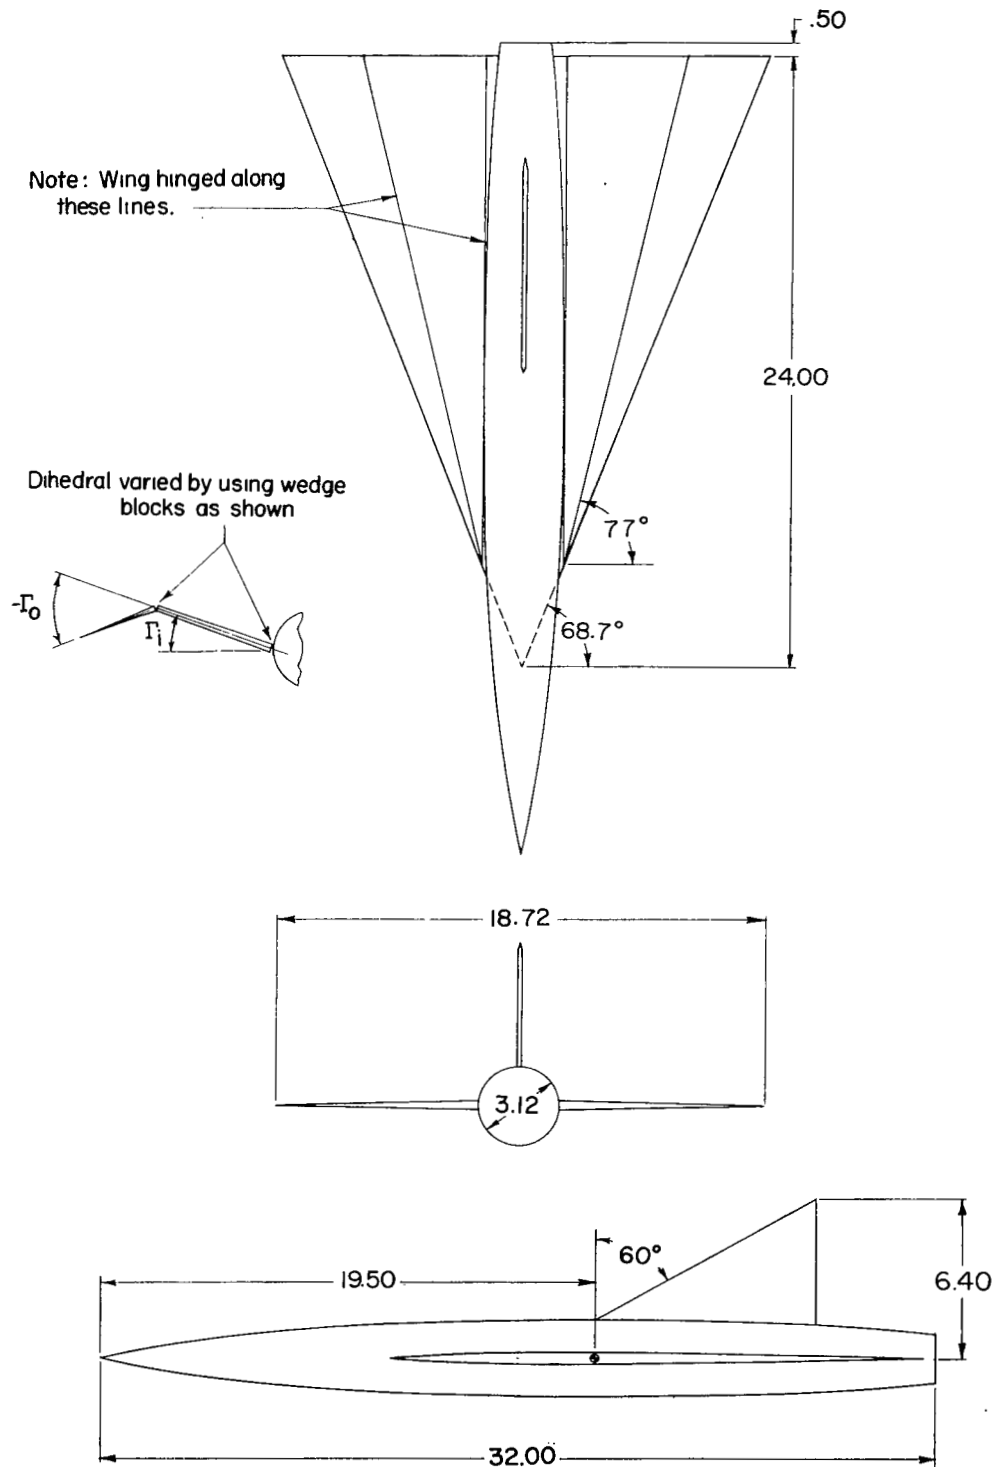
Sketch of the model used in the investigation. All dimensions are in inches.
